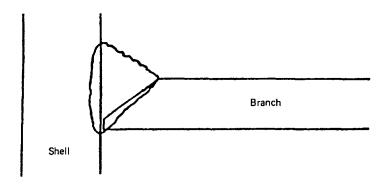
Structural joint, fully penetrated weld.
